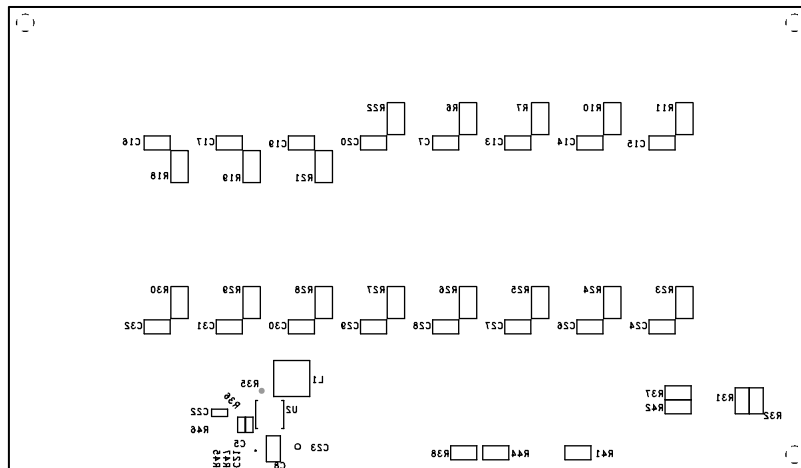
EVAL-AD5679RSDZ Bottom Side Component Placement
